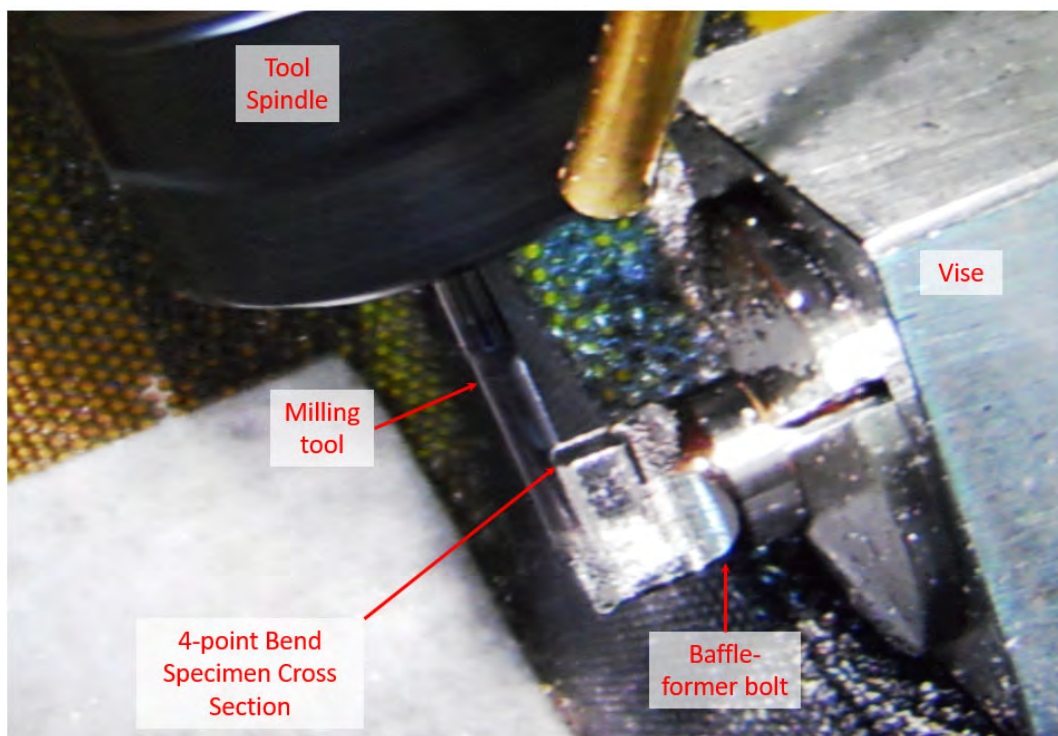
View within CNC machine, within M Cell, showing milling of 4-point bend cross section into threaded end of bolt
